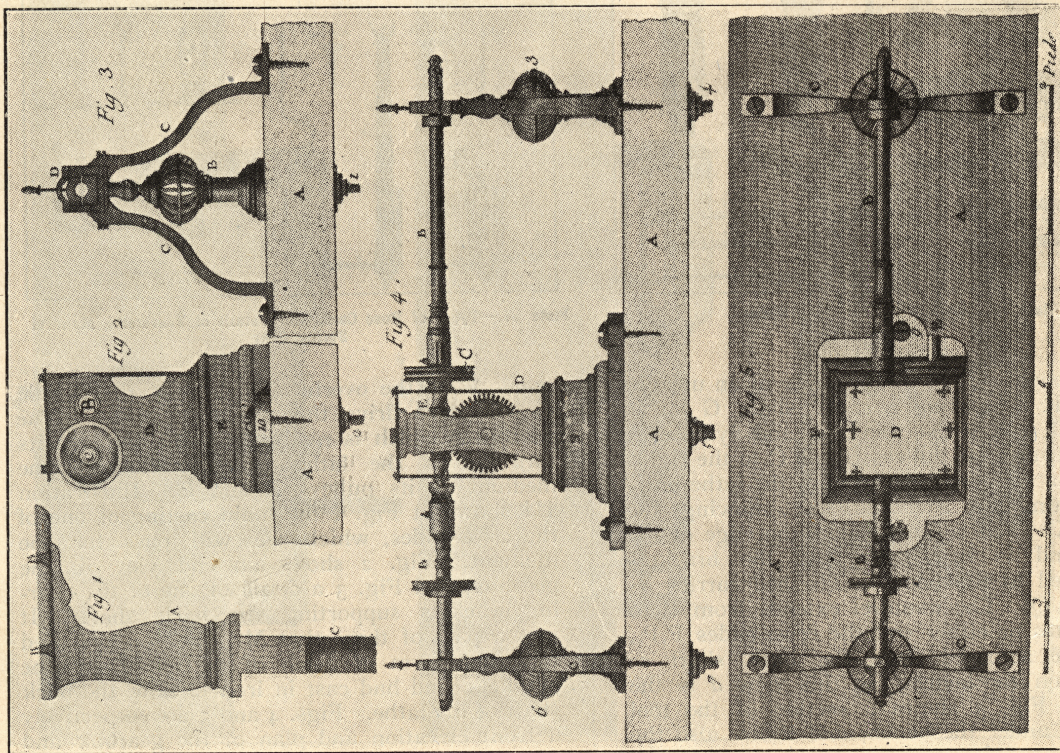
Plate III.—Details of a Cross Slide Casting and of the Traversing Gear.
